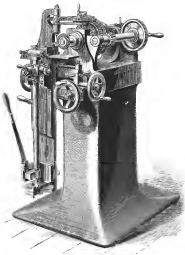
PHOTOGRAPHIC GRAN CUTTER ENGINE.
